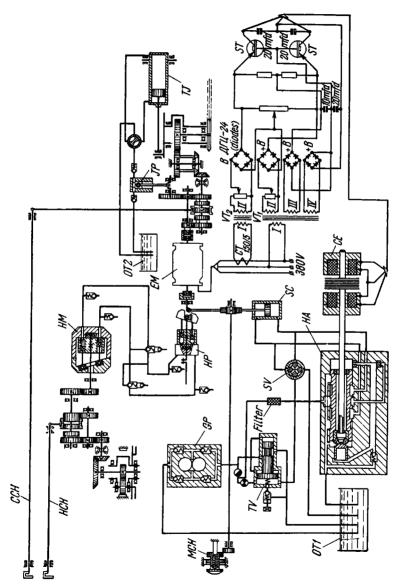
Gearing and hydraulic circuit diagram of Ural-33A coalcutter
